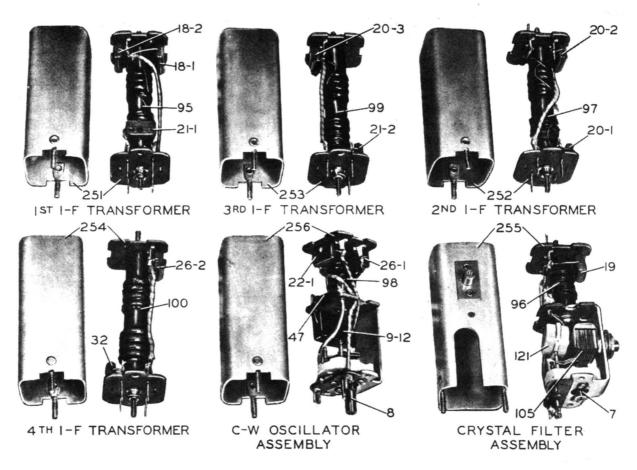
I-F TRANSFORMERS, C-W OSCILLATOR, AND CRYSTAL FILTER ASSEMBLIES
